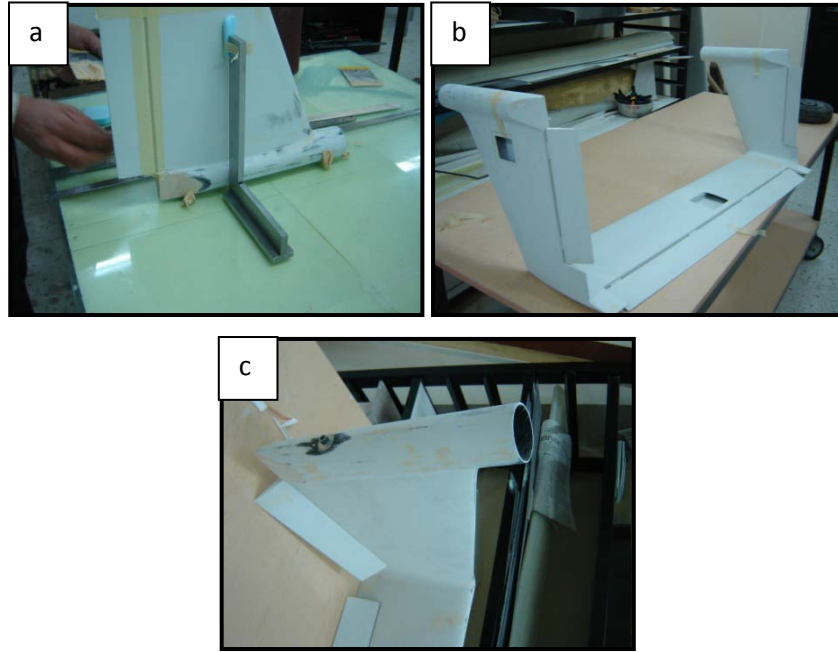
Tail jigged for final assembly (a), tail assembly (b), tube-to-boom connection bolt attached(c)
